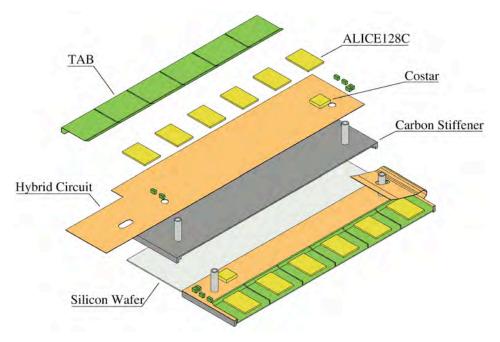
Exploded view of one detector module. It takes 16 modules to fill a ladder.
